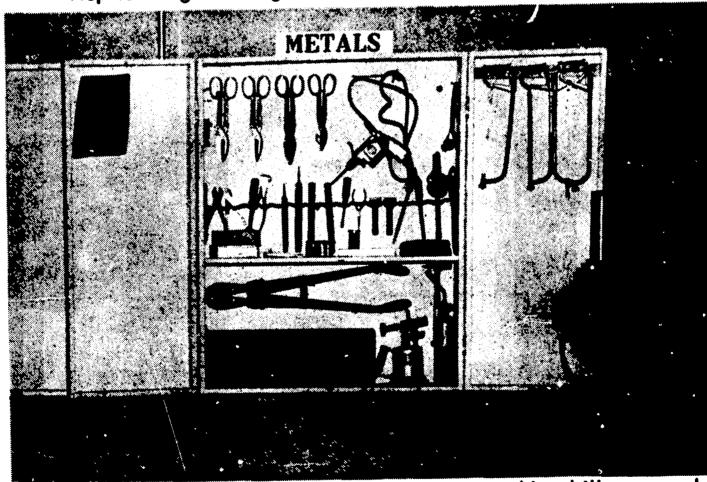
A portion of a metal laboratory work area showing table, drill press, and tool cabinet. This cabinet does not contain a complete set of metal-working tools (see tool list, page 45). Size of cabinet: length 48 inches, width 36 inches, depth 10 inches. Not shown here are sheet metal clamps, vises, anvil, and other items essential for metal work.
